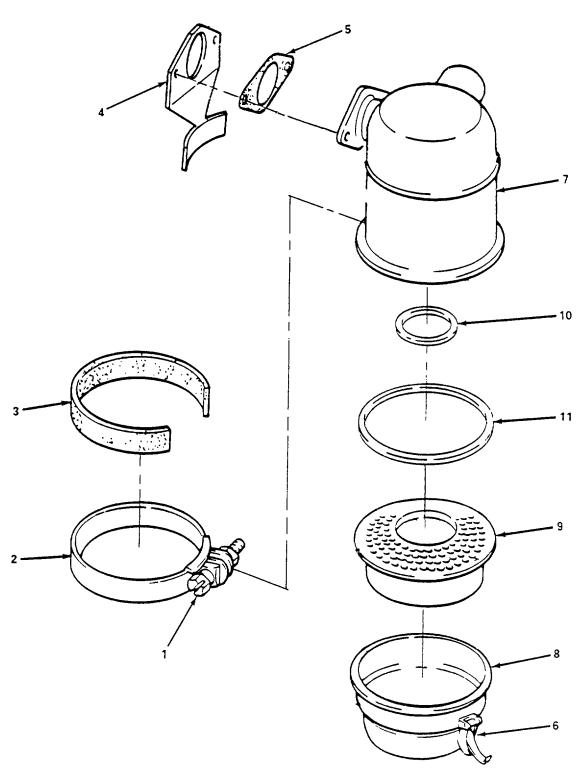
Oil Bath Air Filter Assembly, Repair.
